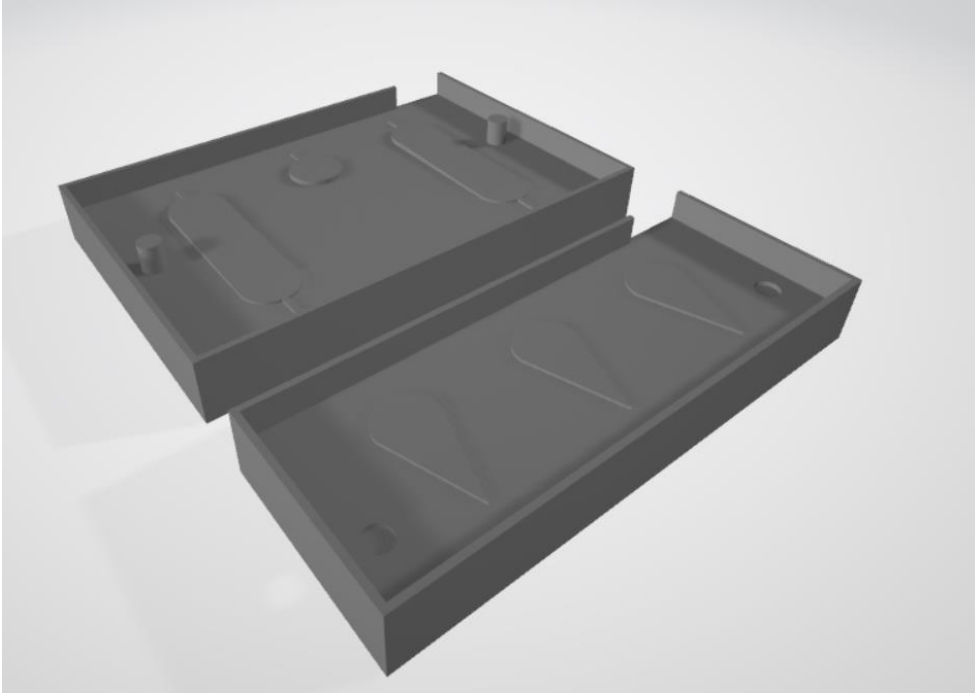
(Chapter 2) 3D printing master mold design (two pieces) for SEER device.
